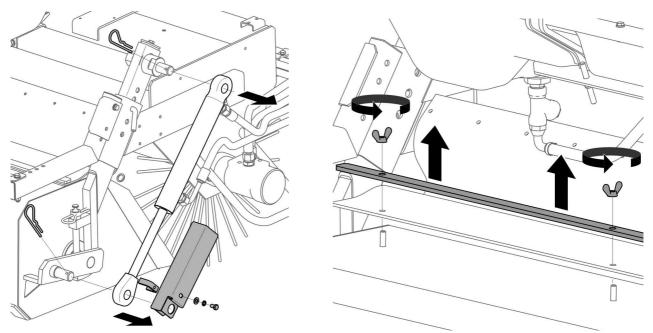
A Removing of the hydraulic cylinder and a rubber apron strip
